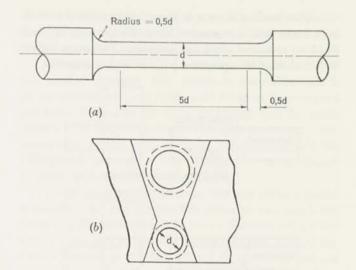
Specimen No. 1 Tensile Test for all Weld Metal
